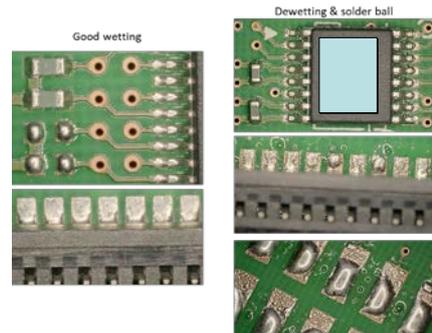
Inconsistent soldering quality, massive solder ball residue and de-wetting on one of the product test board
